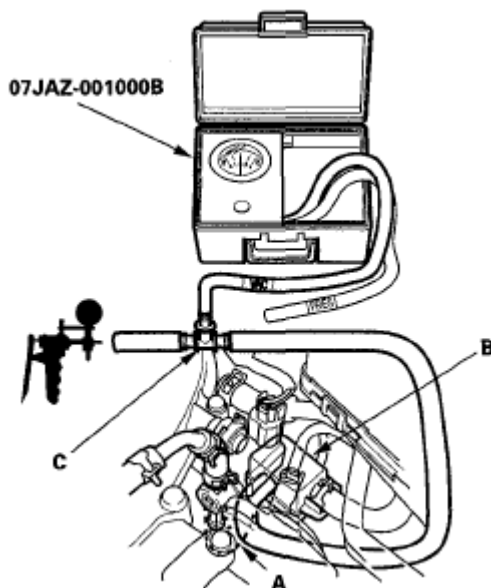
Identifying Vacuum Hose And EVAP Canister Purge Valve Joint
